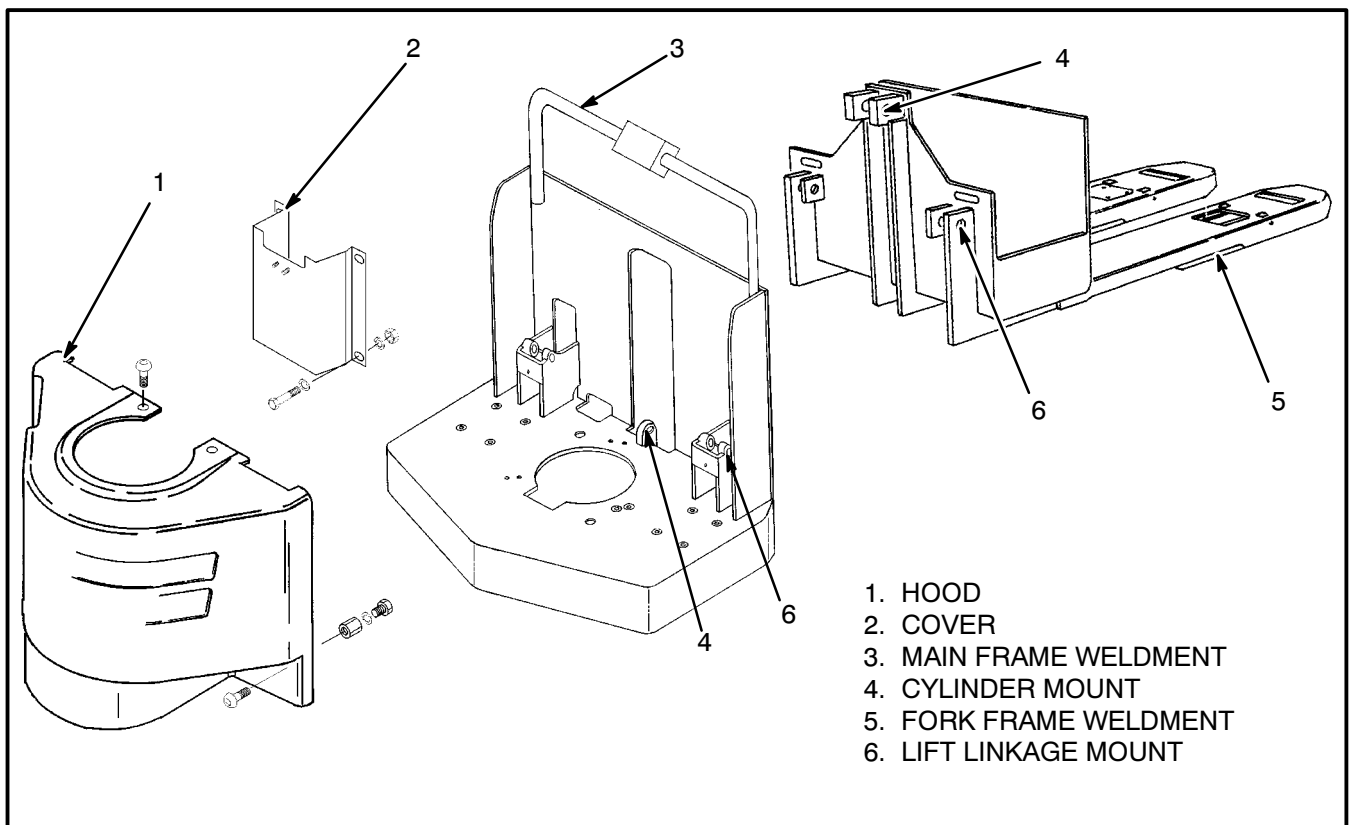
FRAME WELDMENT - B60-80XT
